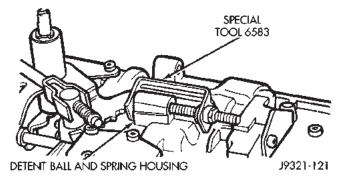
Securing Detent Ball And Spring With Retainer Tool
